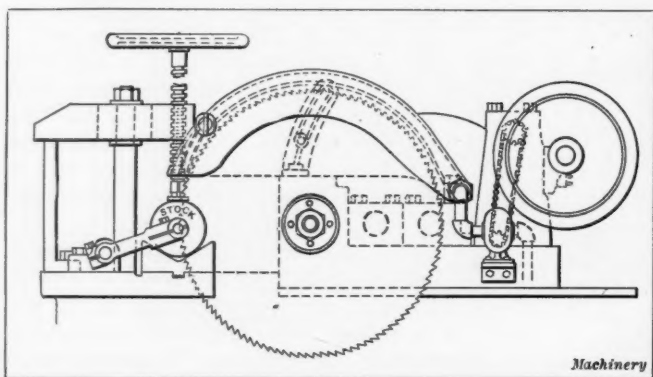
Nutter & Barnes 6-inch Cutting-off Machine equipped with Stock Feed Attachment
